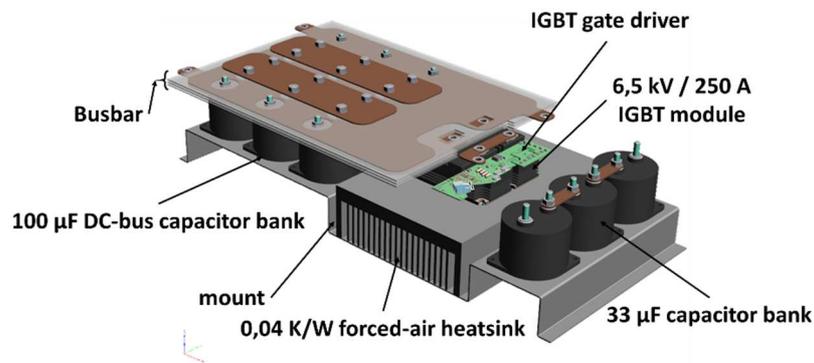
3D view of the buck chopper power stack (without inductor, cooling fan and control board)
